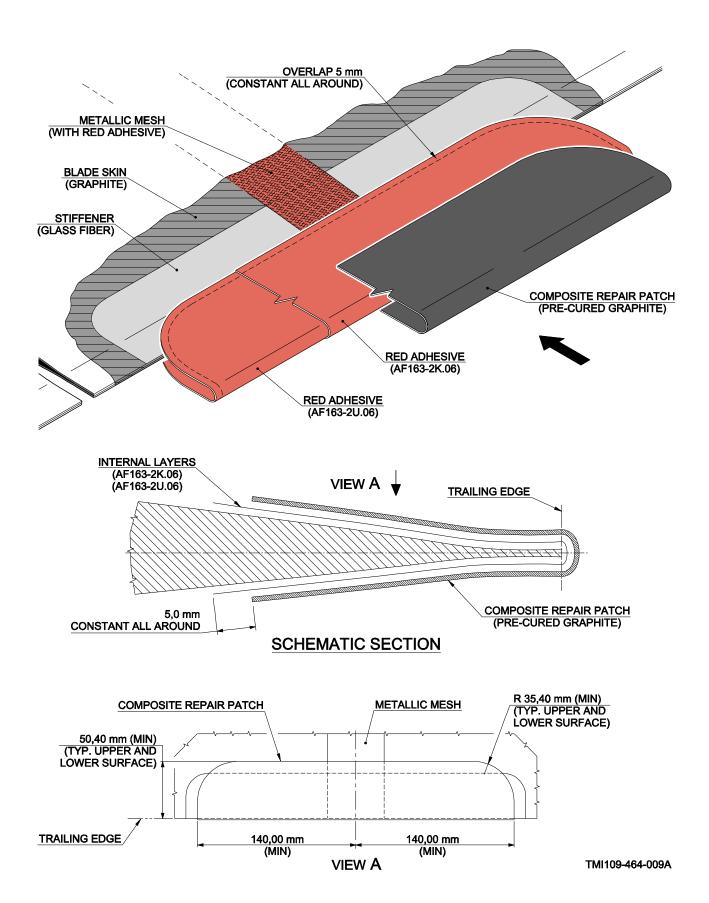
Main rotor blade - Replacement of the trim tab (composite repair patch installation).
